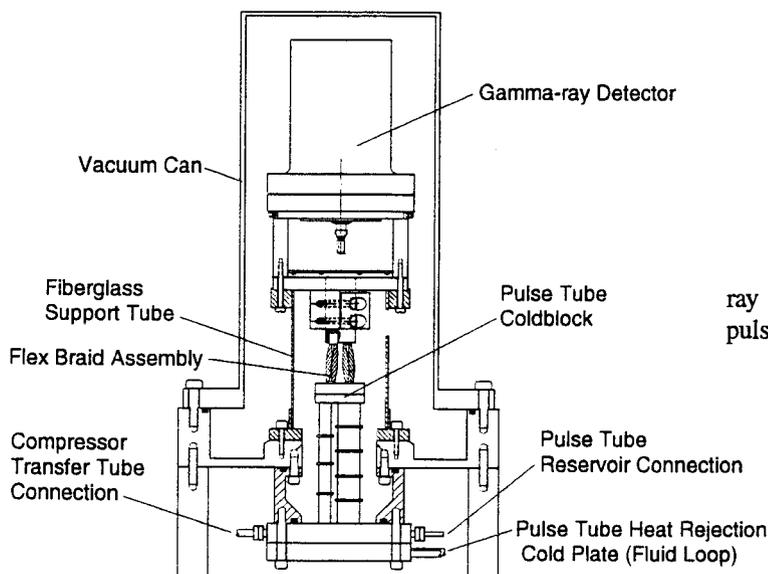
Schematic of gamma-ray detector test setup with integrated pulse tube expander.
